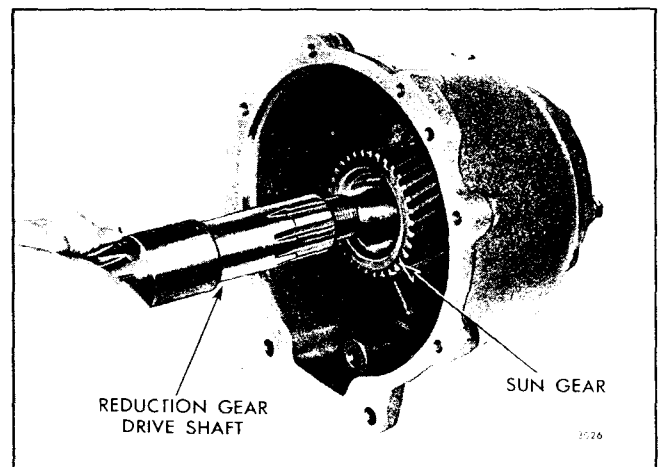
Installing Reduction Gear Drive Shaft in Sun Gear and Bearing (1.5:1 Ratio)
